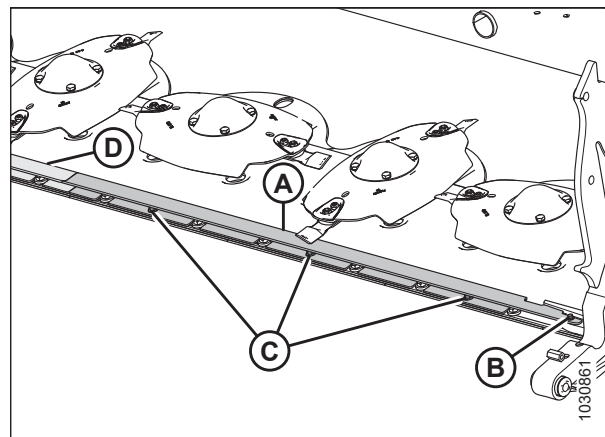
Right Deflector Plate Installed on Aft Edge of Cutterbar – View from Rear
